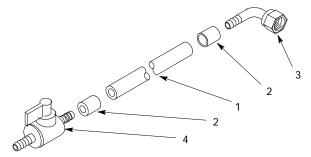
RESEVOIR TANK TUBE ASSEMBLY
